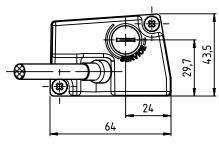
Dimensioned drawing KB 301-3000 connection hood
